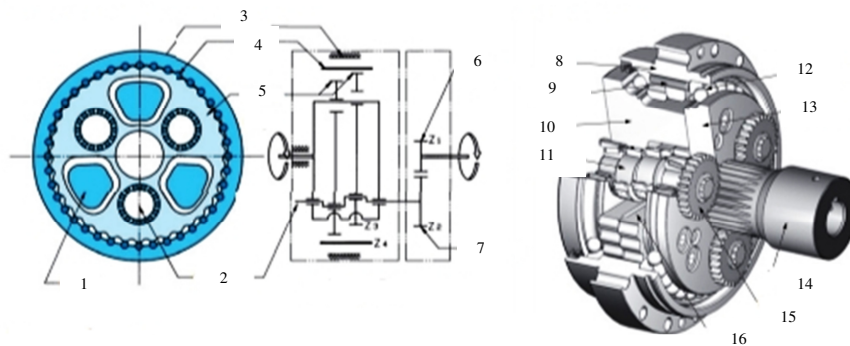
Kinematic object of the reducer - 1. shaft, 2. crankshaft, 3. case, 4. pin, 5. RV gear, 6. input gear, 7. spur gear, 8. case, 9. pin, 10. shaft, 11. crank shaft, 12. main bearing, 13. hold flange, 14. input gear, 15. spur gear, 16. RV gear
